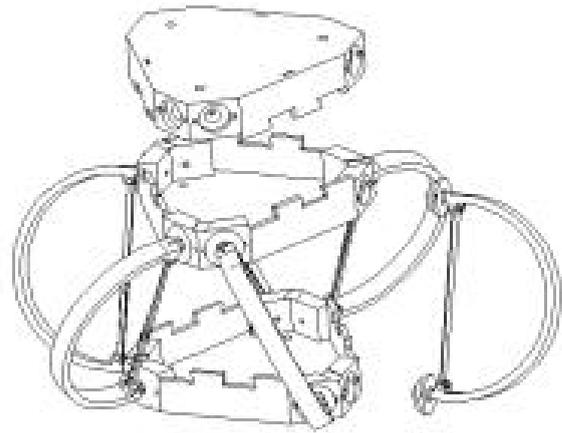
An exploded view of the single stage Stewart platform shape and shape memory alloy actuator.
